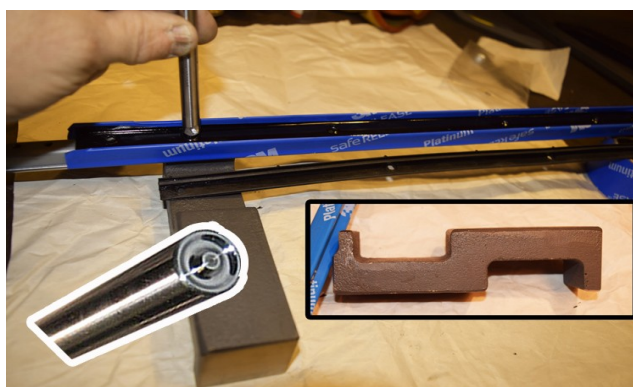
Using hand crimper and steel backing block to clinch rivets.
